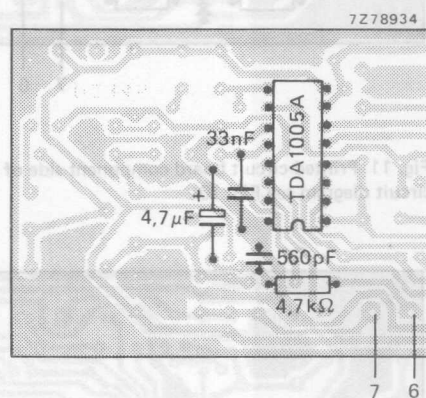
Printed-circuit board component side, showing component layout of Fig. 15.
